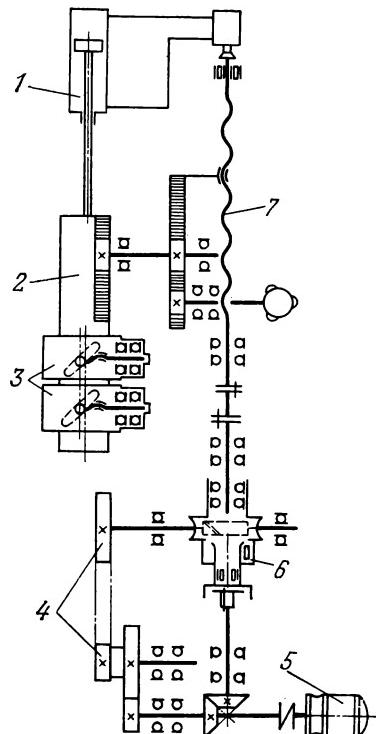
Kinematic diagram of the horizontal tool head feed drive in the model 1272 semiautomatic
